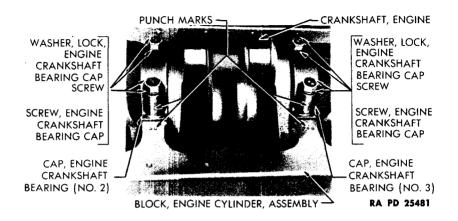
Prick Punch Marks To Locate Crankshaft Bearing Caps
